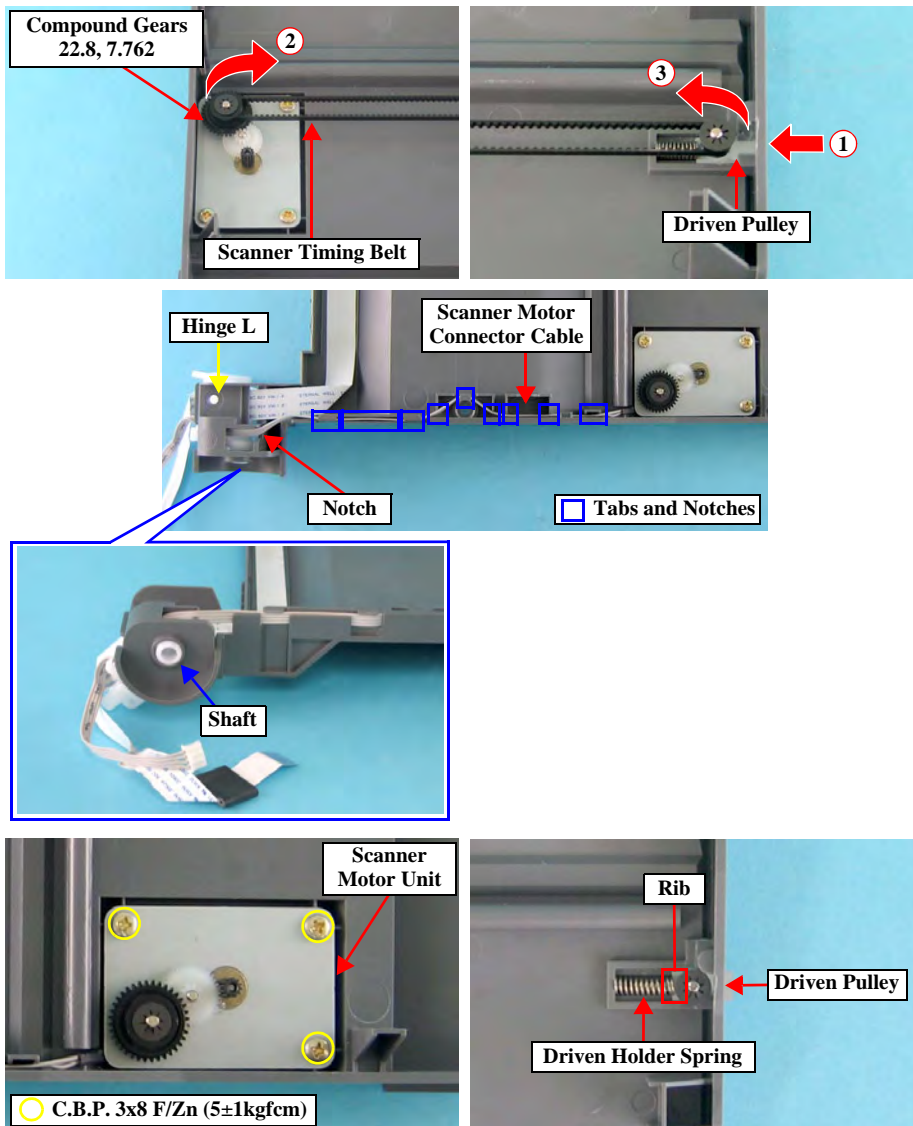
Removing Scanner Motor Unit/Driven Pulley
